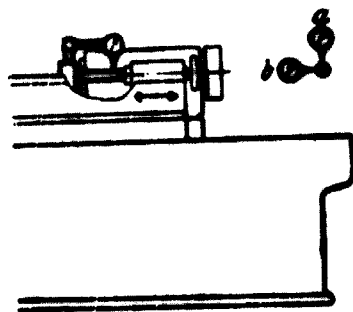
Parallelism between Tailstock Sleeve and Direction of Table Traverse
